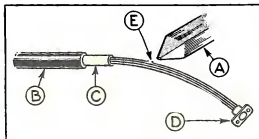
(A) Soldering iron. (B) Control cable housing. (C) Control cable housing cap. (D) Control cable nipple. (E) Broken wire to be soldered as a unit with several of the other wires.
